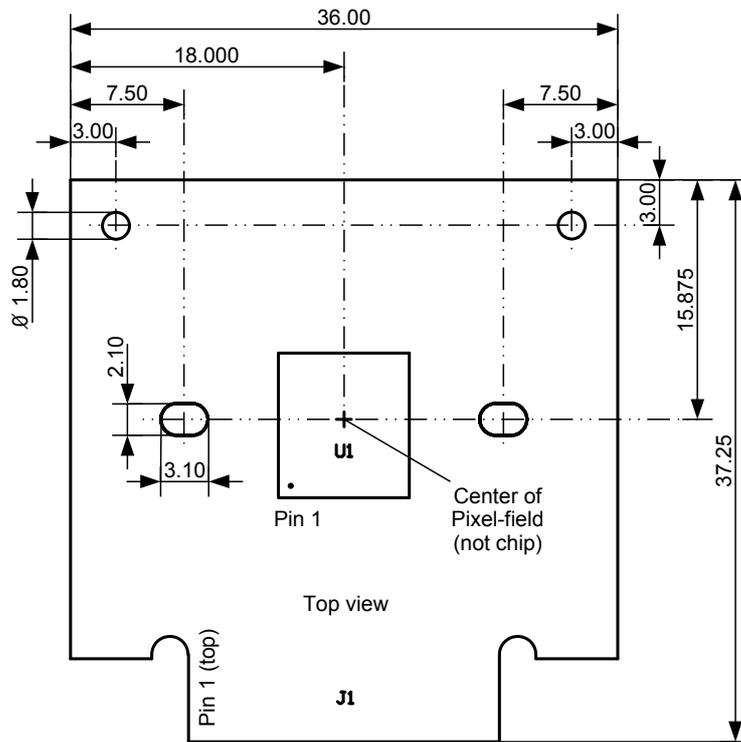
epc660 Card Edge Connector Carrier: Dimensions
